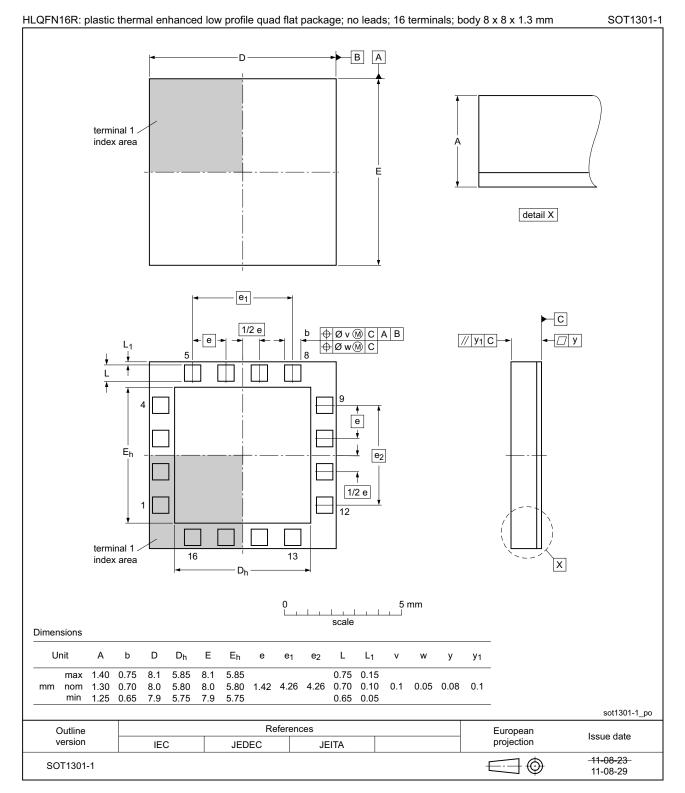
Package outline SOT1301-1 (HLQFN16R)
